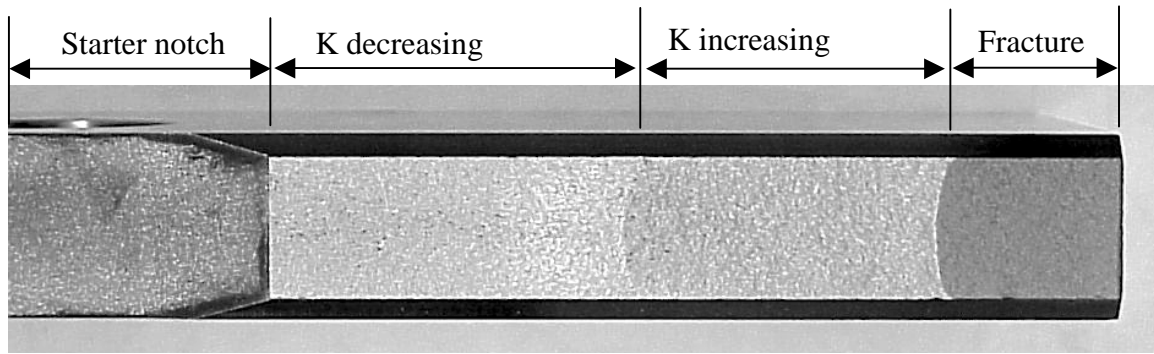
GC(T) specimen fracture surface.
